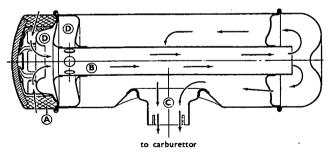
A.C. combind air cleaner and carburettor intake silencer
